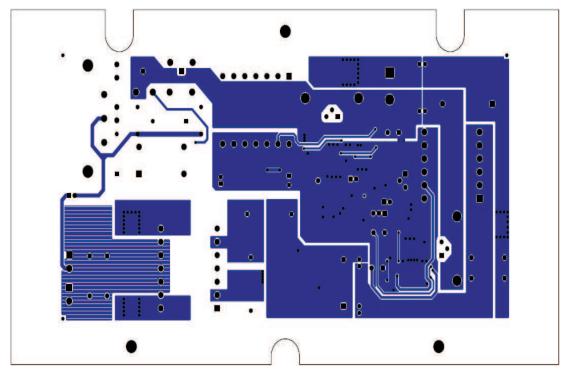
Non-Isolated 240-W LED Driver PCB (bottom view)
